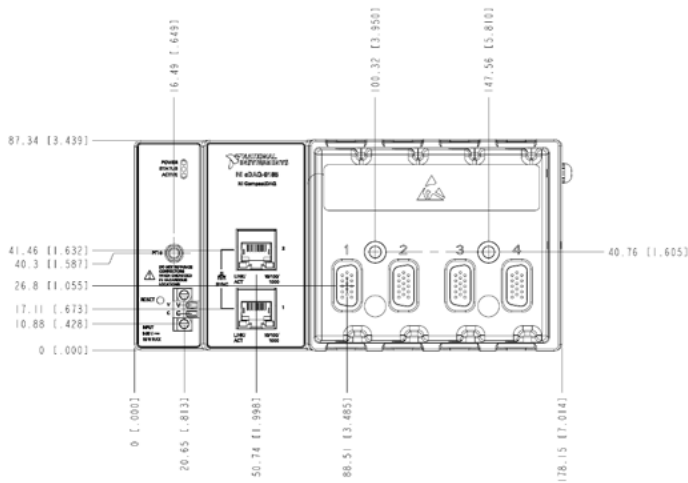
2D dimensional drawings and 3D models are available on ni.com. Available file formats for the cDAQ-9185 (2D drawing shown in image) include PDF, DXF, PRT, STP, and IGS.
